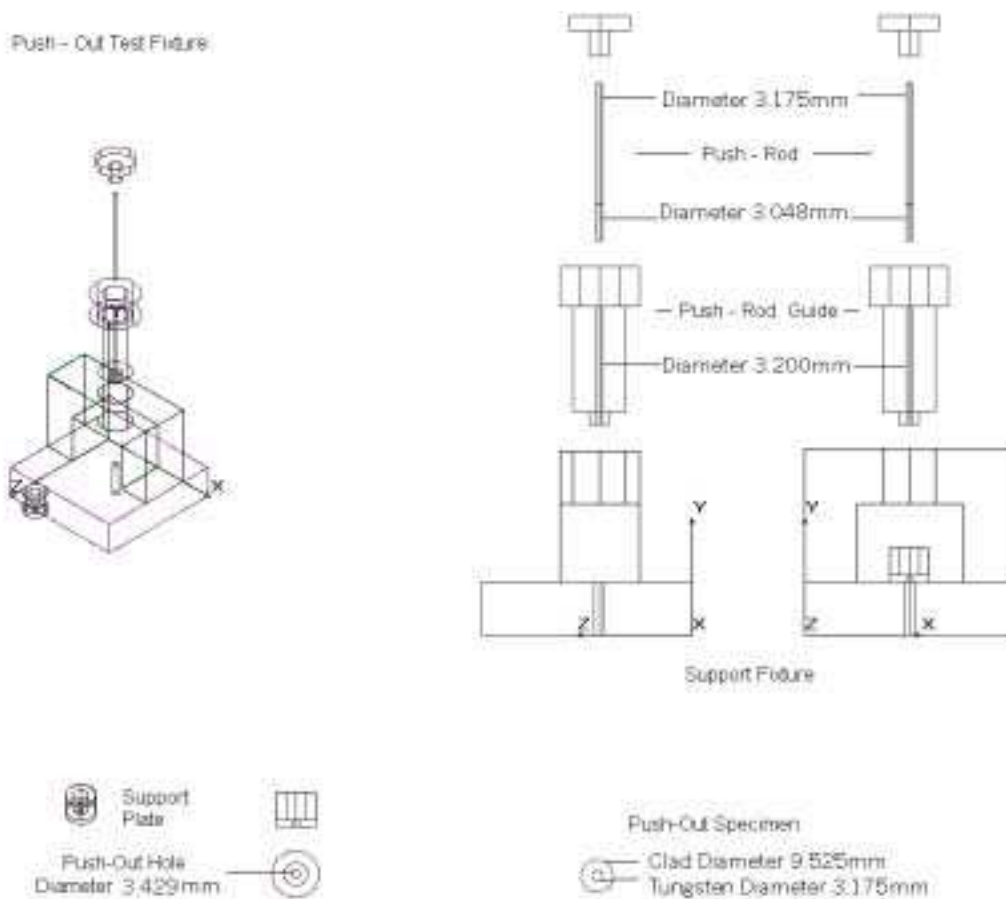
Schematic of push-out fixture and support plate used for testing 316L SS clad tungsten rod specimens.
